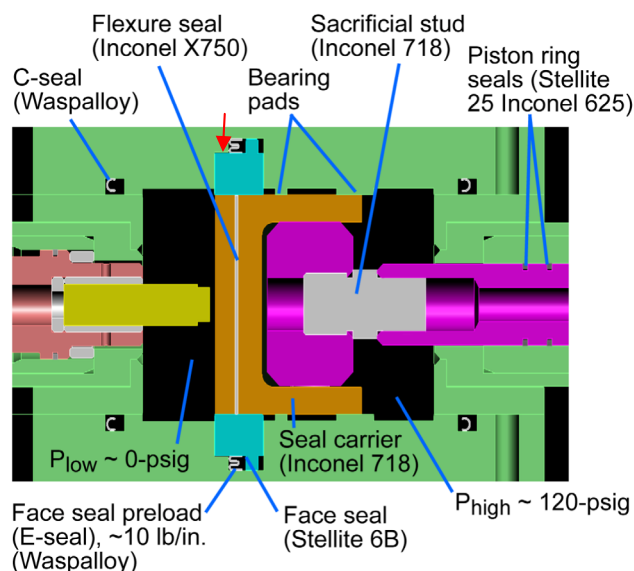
Chamber detail showing seal carrier and adjacent face seals with E-seal preloader, actuator rod piston ring seals (2 places), chamber cover C-rings (4 places), the materials used in construction, and chamber high and low pressures. Red arrow indicates location of trial seal, as discussed in the Procedure Section.
